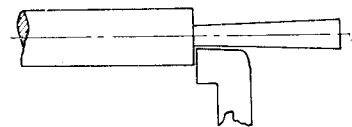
Due to heavy cutting strain, material rides away from tool at extremity—resulting in taper shown
